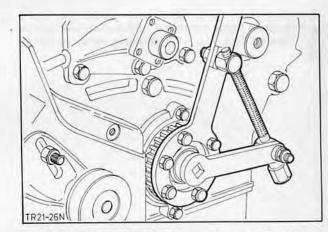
Slacken crankshaft hub centre bolt using Special Tool 21–018/019
